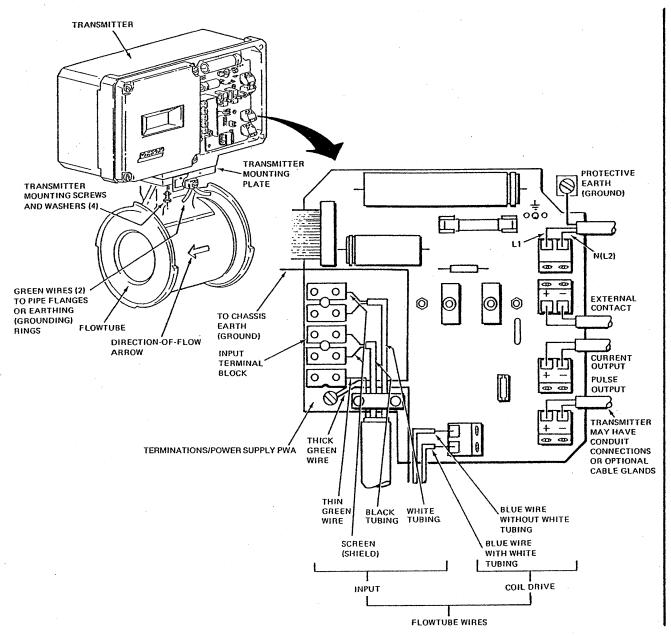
Wiring and Mounting Details of Integrally-Mounted Transmitter
